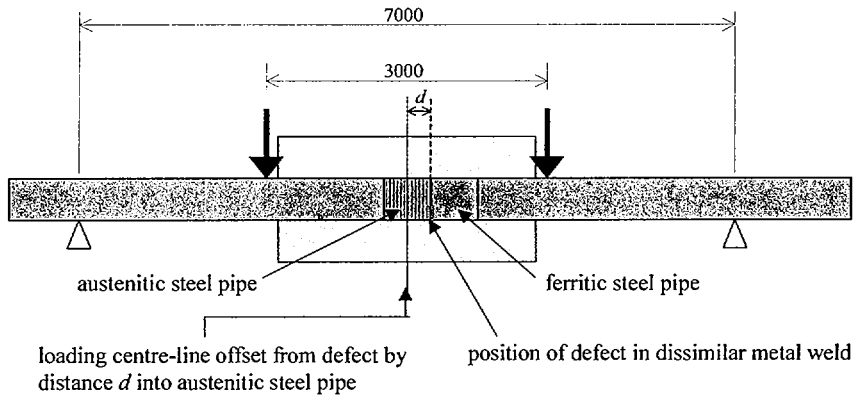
Four-point bending loading configuration of ADIMEW test assembly
